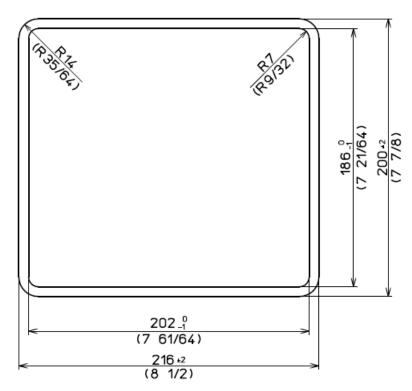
Outline dimensions of a transducer (TD-756)
